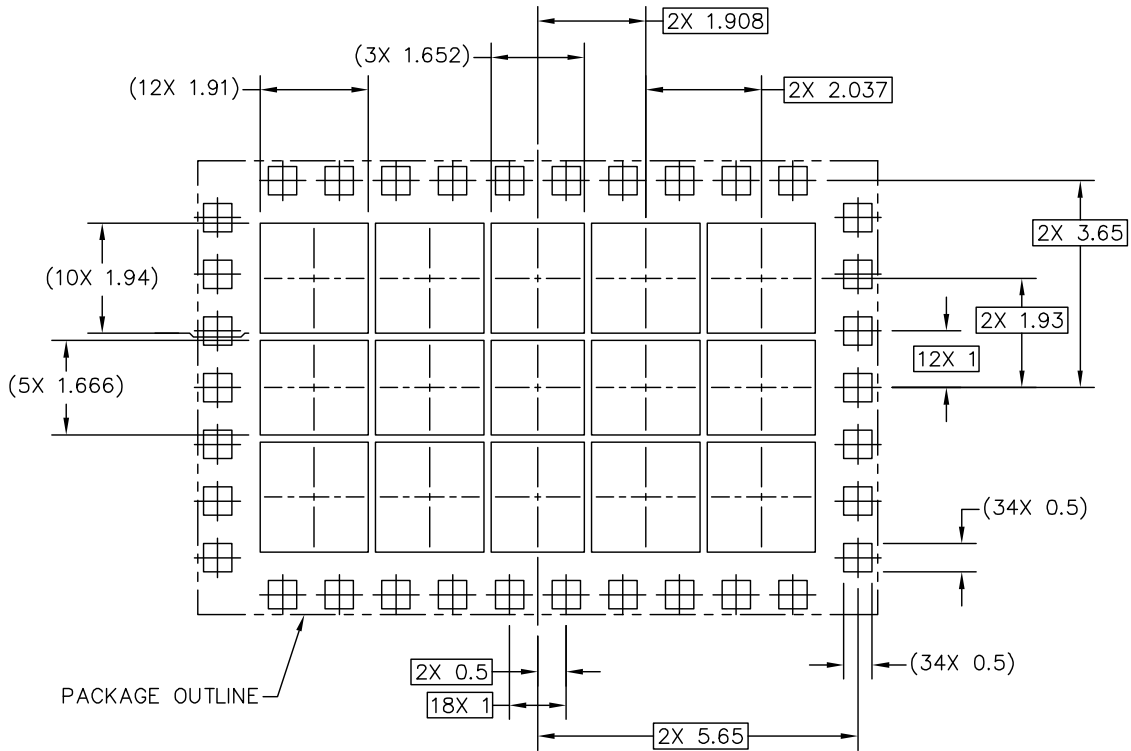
Package outline (12 mm × 8 mm Module) — top view
